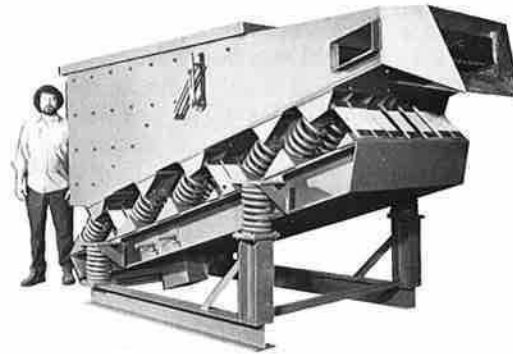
This attrition mill for nobake sand is equipped with the same common kinergy drive system.
